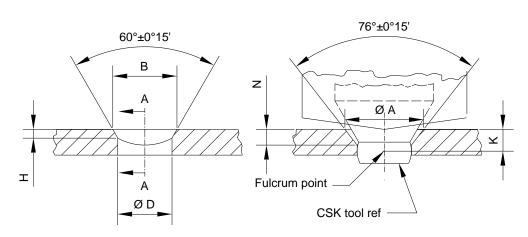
Hole Geometry (Geometry Code R4) and dimensional requirements for installation of NAS1734/1735 blind rivet nuts installed to AIPS01-02-027 (Hole tolerance Code F2)
